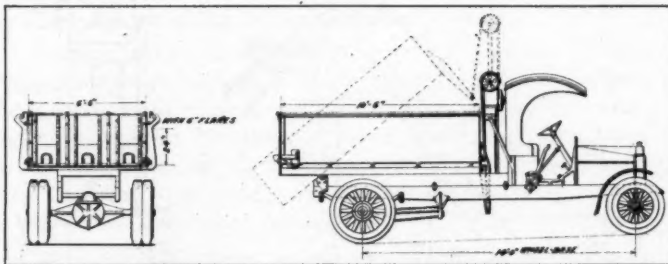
TRUCK WITH STEEL DUMP BODY AND HYDRAULIC HOIST
